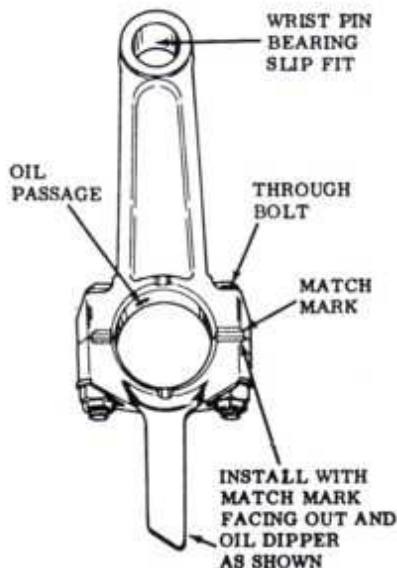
Connecting rod assembly used on Models HH80, HH100 and HH120.
